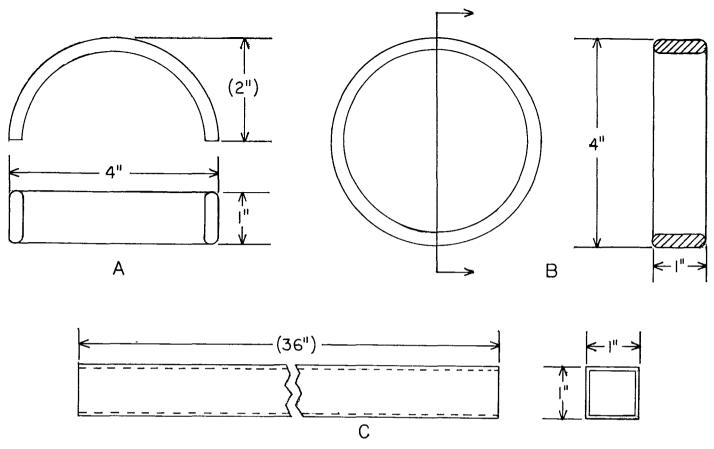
Views of the parts to be welded to the hood. A, anchor loop. B, tow ring. C, square steel tubing.
